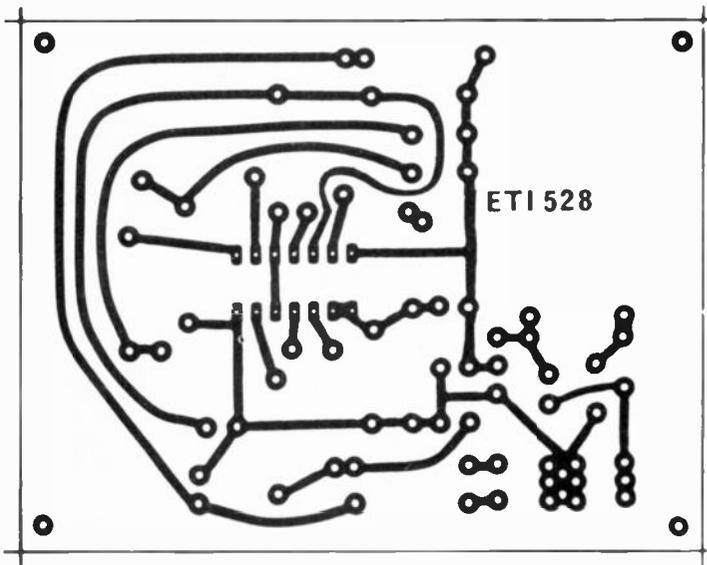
Printed circuit board layout for the alarm. Full size 90 x 70 mm.
